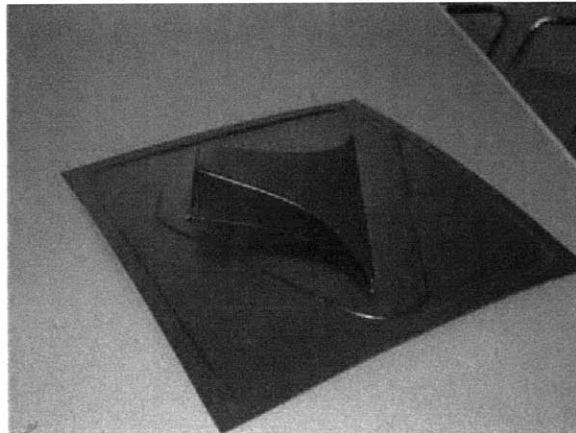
This should be the actual part that the mold in figure 9 produced. The parts were made out of ABS plastic and one part was made out of Kydex to experiment. ABS produced the cleaner product that was sharper around the edges.
